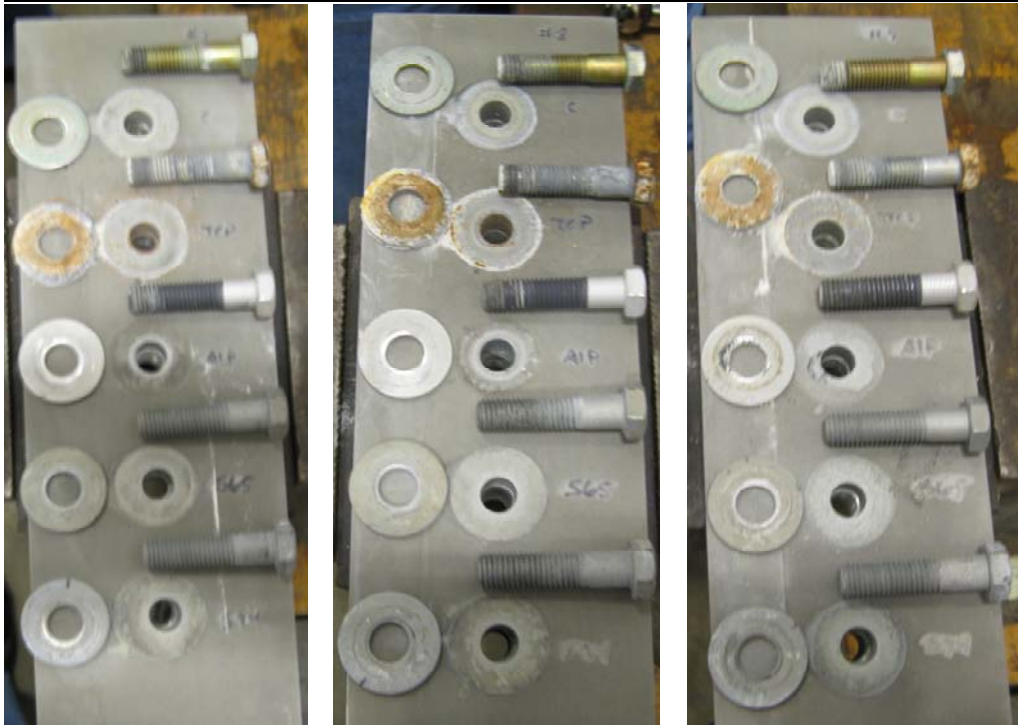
Plates 7-9 disassembled after 120 cycles GM9540P.
